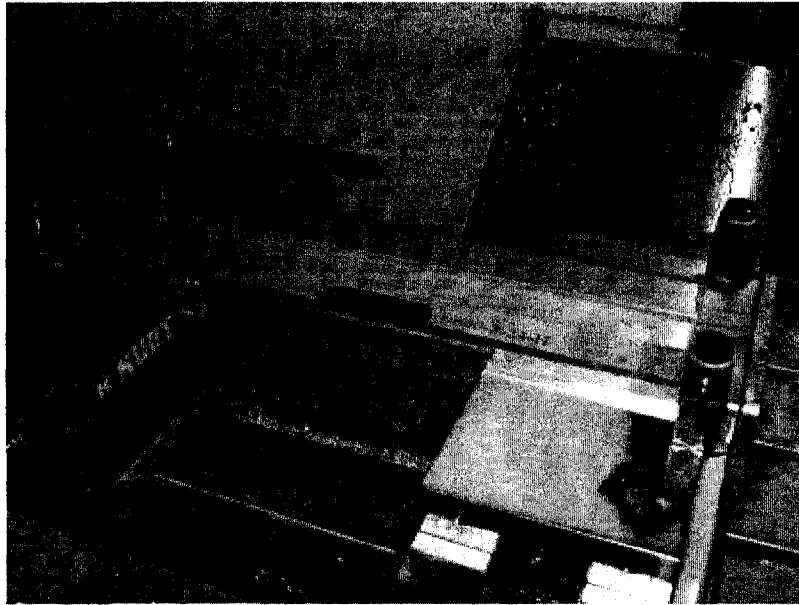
600S162-33 short column specimen oriented in CNC machine
